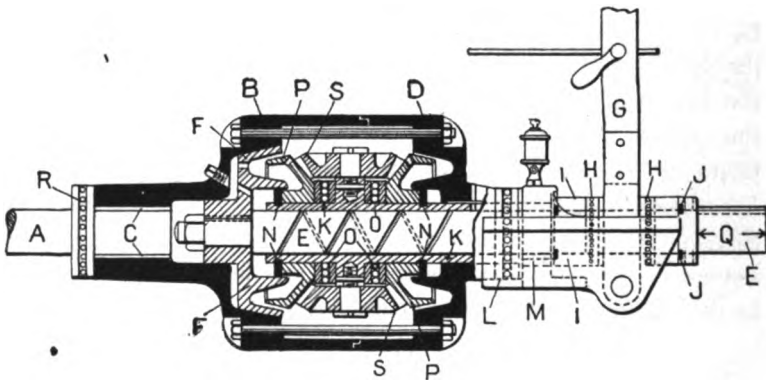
FRICTION CLUTCH REVERSING GEAR.
